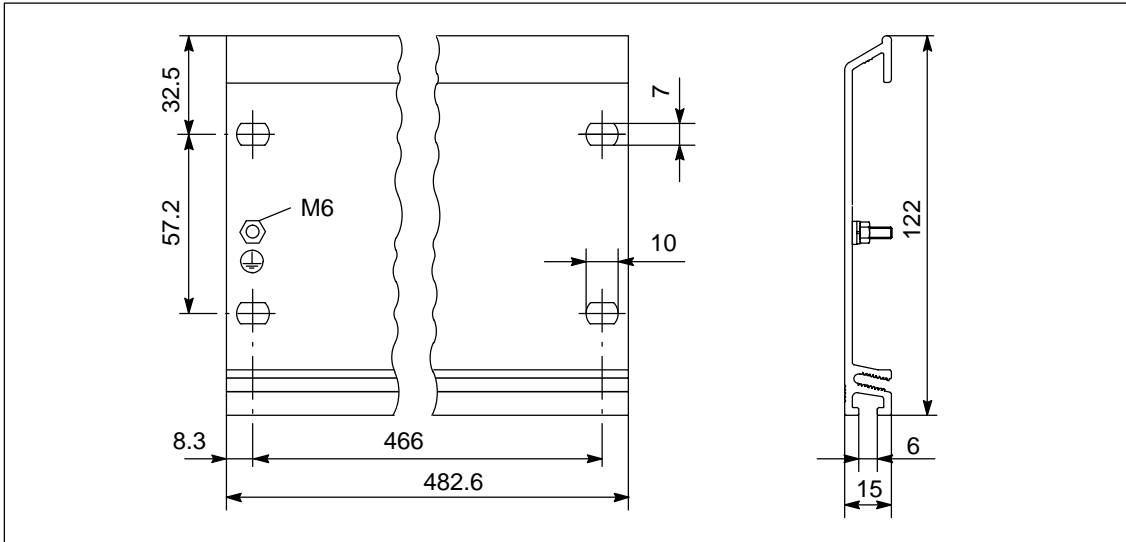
Dimension Drawing of the Rail with 482.6 mm Standard Width
